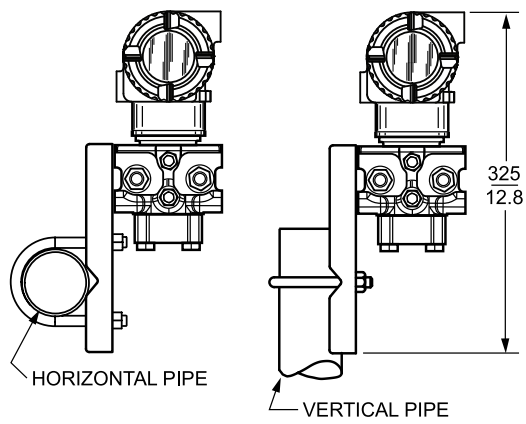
DP Transmitters with Traditional or LP2 Structure and Options -M1 and -M2 (Standard Style Mounting Bracket)
